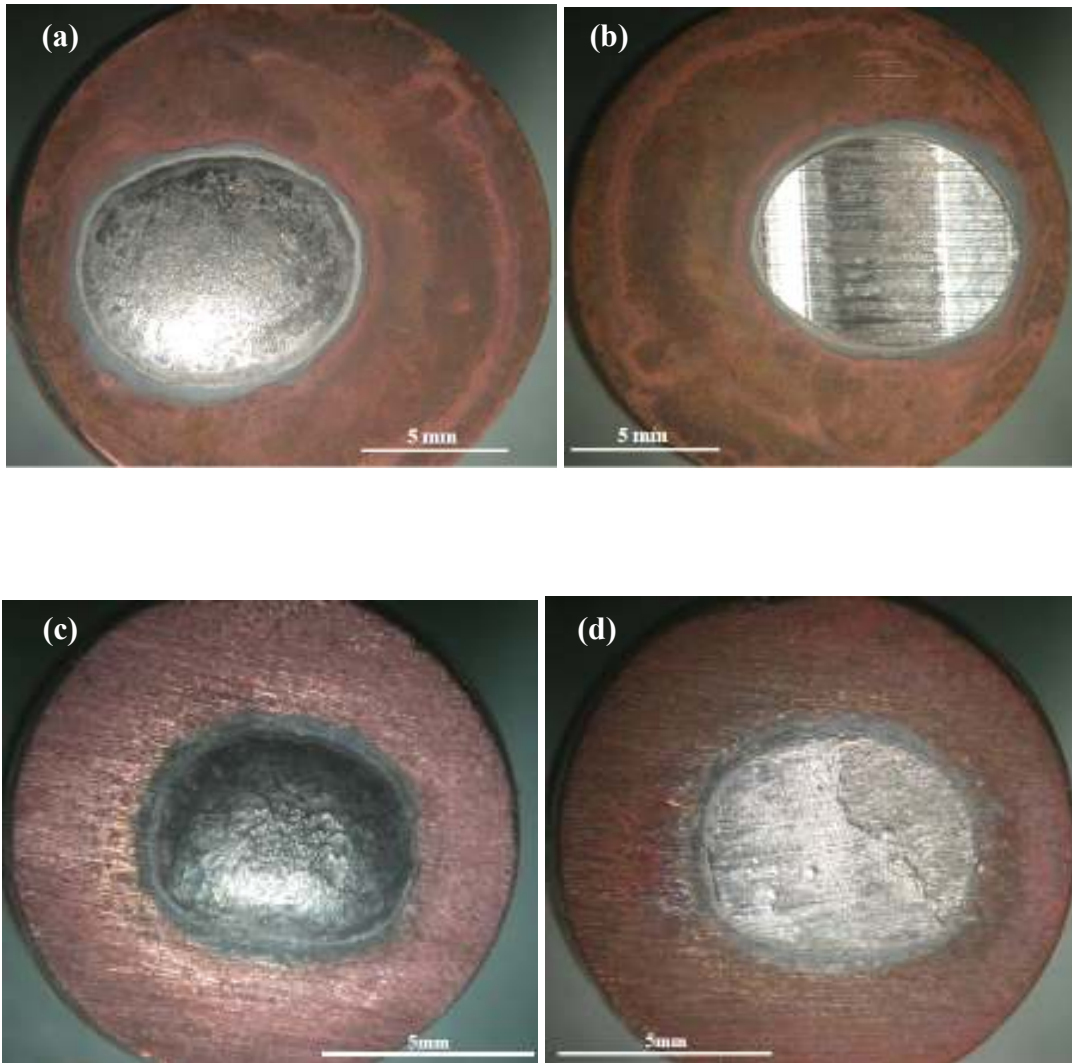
Macroscopic images (top view) of stabilized Sn-0.3Ag-0.7Cu solder on (a) smooth copper surface (c) rough copper surface. Macroscopic images (top view) of sheared Sn-0.3Ag-0.7Cu solder on (b) smooth copper surface (d) rough copper surface.
